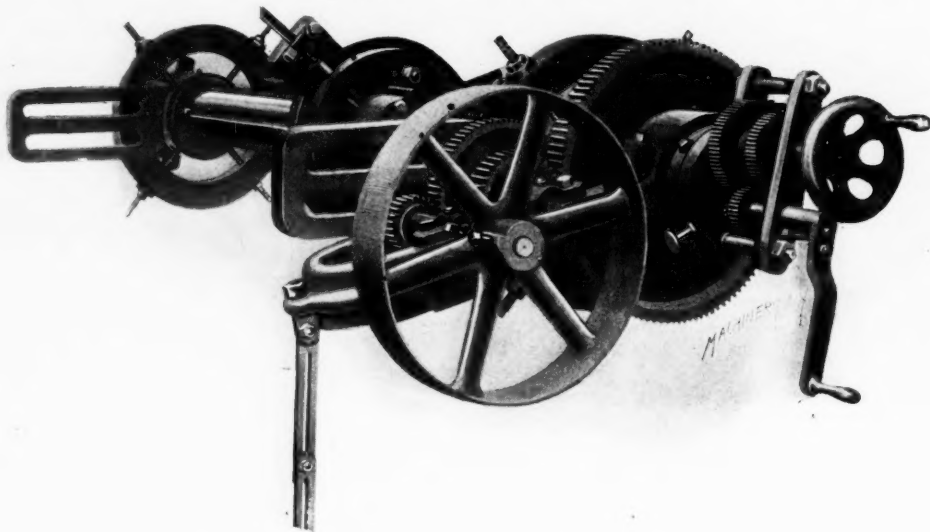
Ryerson Cylinder Boring-bar with Adjustable Geared Feed
